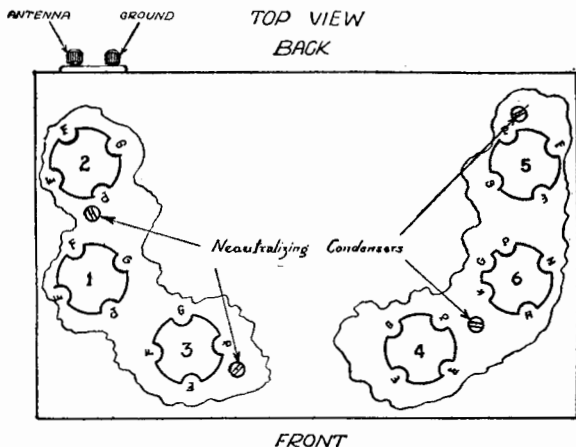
Top view of Radio, showing layout of tubes and neutralizing adjusting screws.
